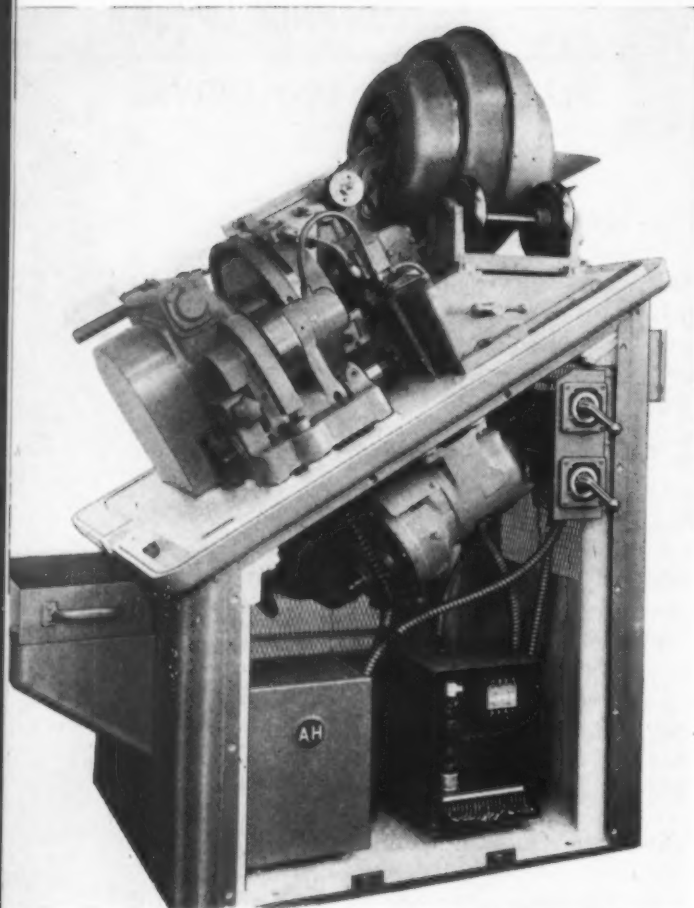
Right—Photocopy machine employing a Gerald K. Heller Co. electronic dc series motor drive
